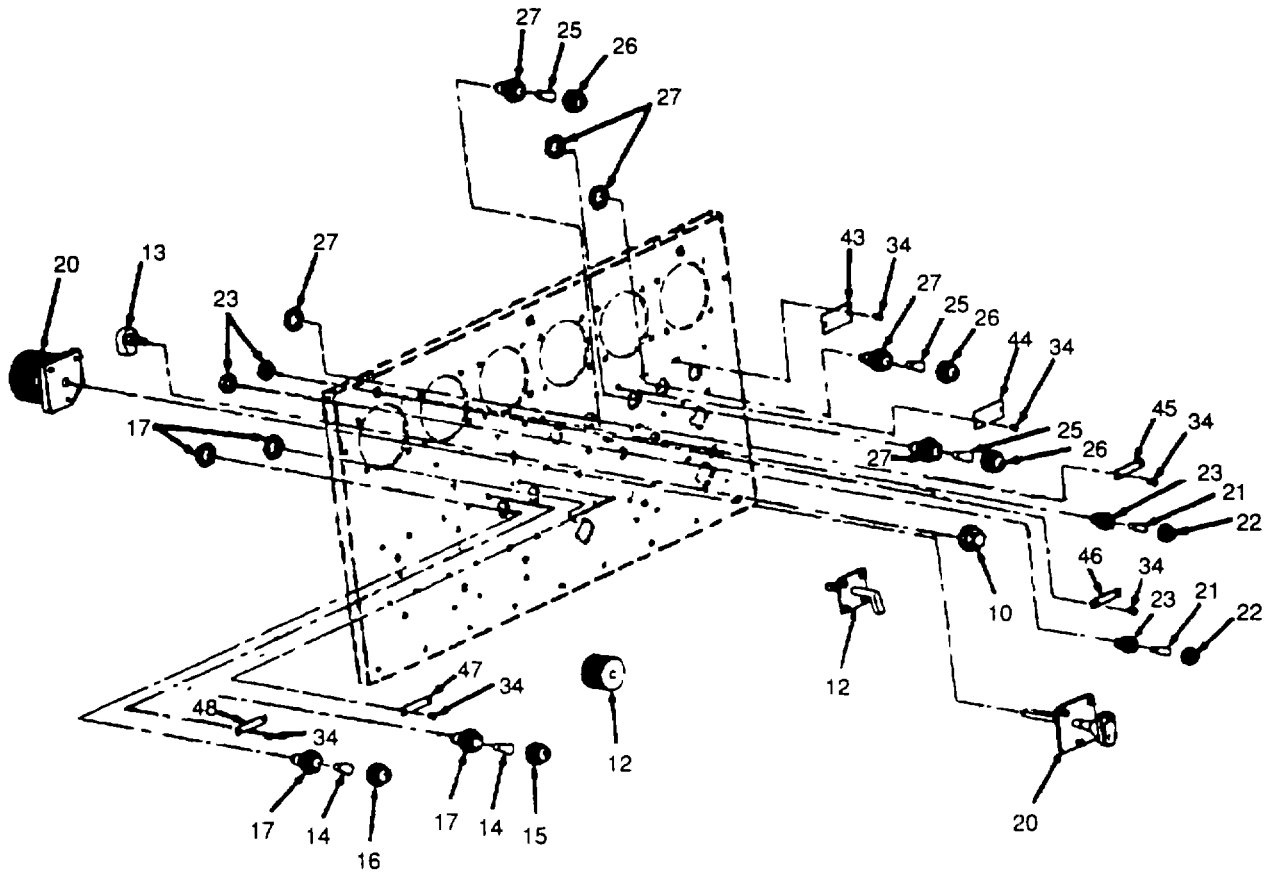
Remote Control Module, Door Assembly (Sheet 3 of 4)
